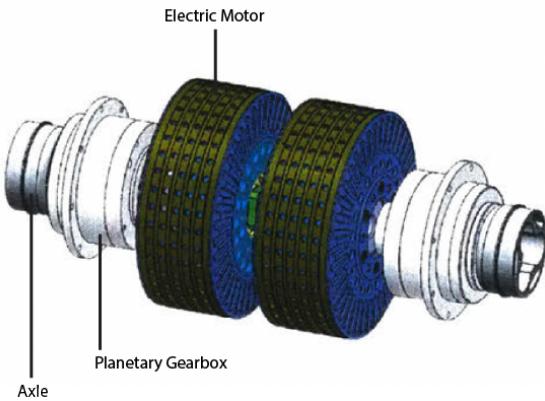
Two Electric Motors with Two Planetary Gearboxes [29]
